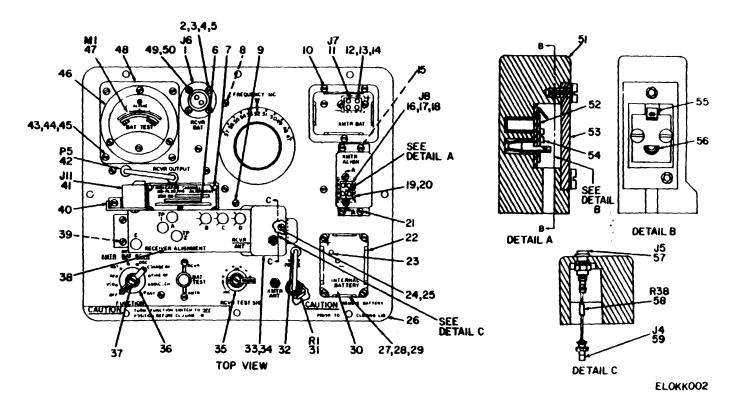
Top Plate Assembly (Sheet 1 of 2).
